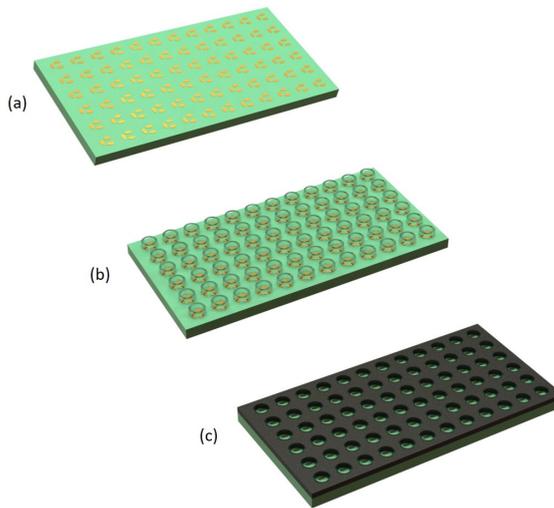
3D schematic of the TPVH-N-PCB fabrication process. (a) 3D model of a PCB board which contains arrays of contact pads for LED integration. (b) 3D model of the PCB board with fabricated hollow TPV array. (c) Molded PCB board with through-hole array made of hollow TPVs.
